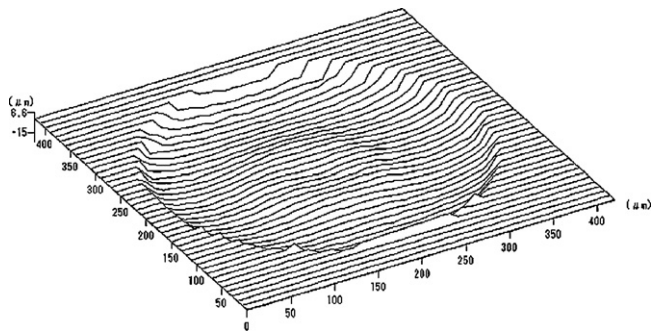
Three-dimensional topography of a machined cavity for the measurement of volume of material removed from workpiece.
